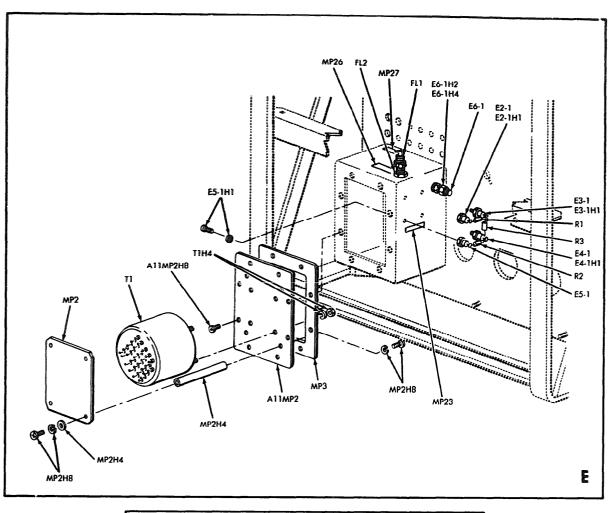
(4). Test set panel assembly 1A3, location of parts (sheet 4 of 7).
